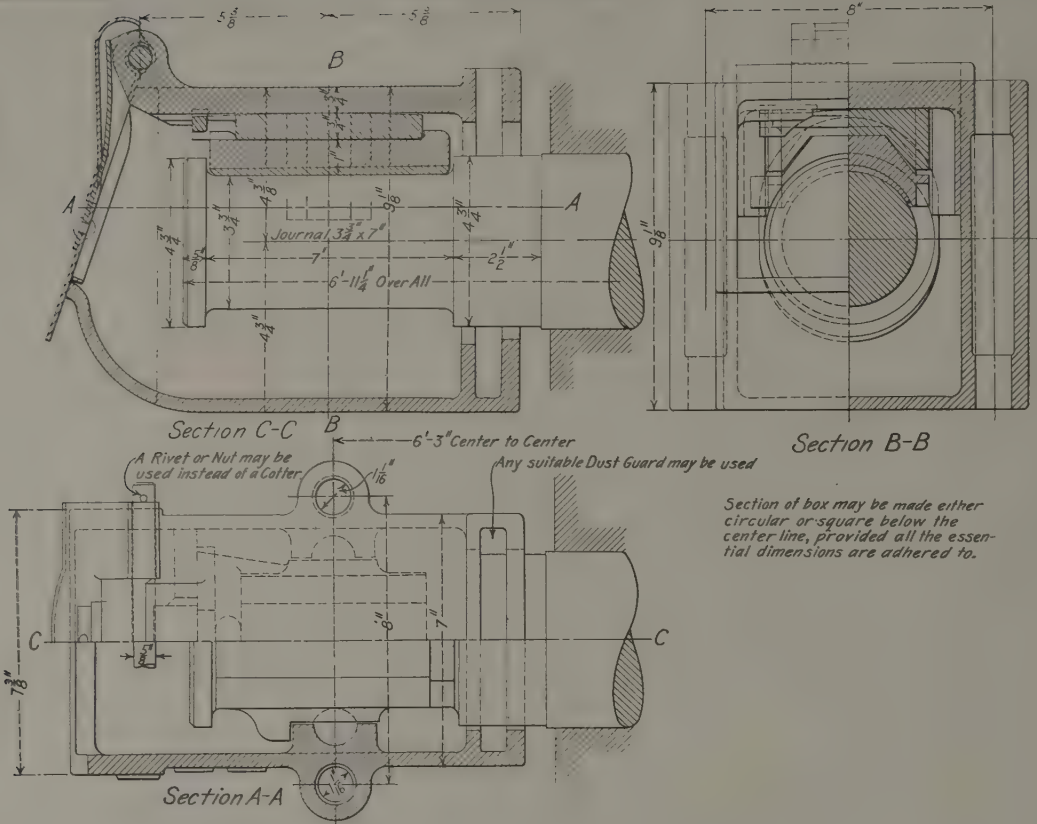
M. C. B. Standard Box and Contained Parts for  $3\frac{3}{4}$  in. by 7 in. Freight Car Journal. (M. C. B. Sheet 1.)
